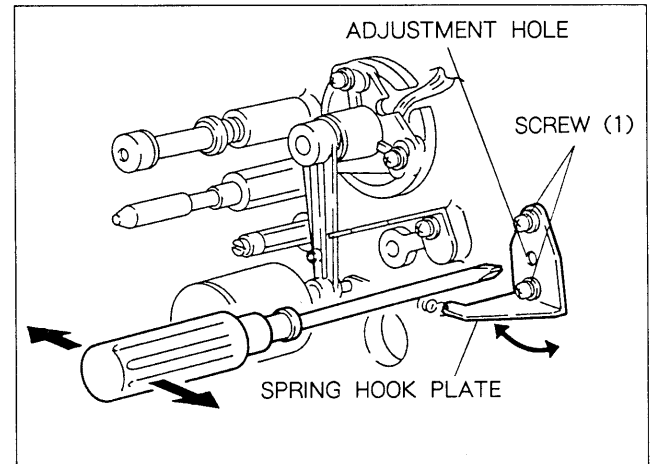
Tension Arm Spring Position Adjustment
